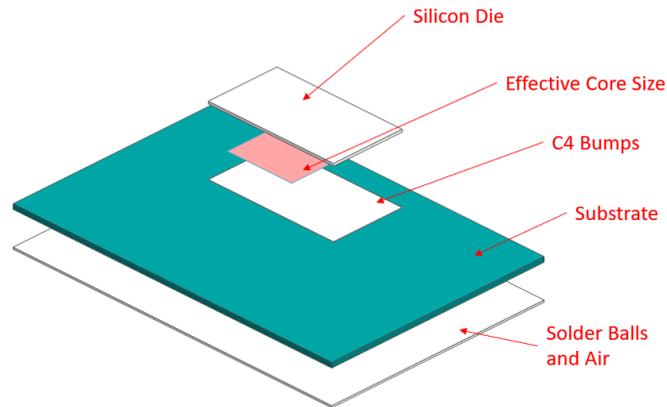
EXPLODED VIEW OF A TYPICAL CPU CONSTRUCTION
